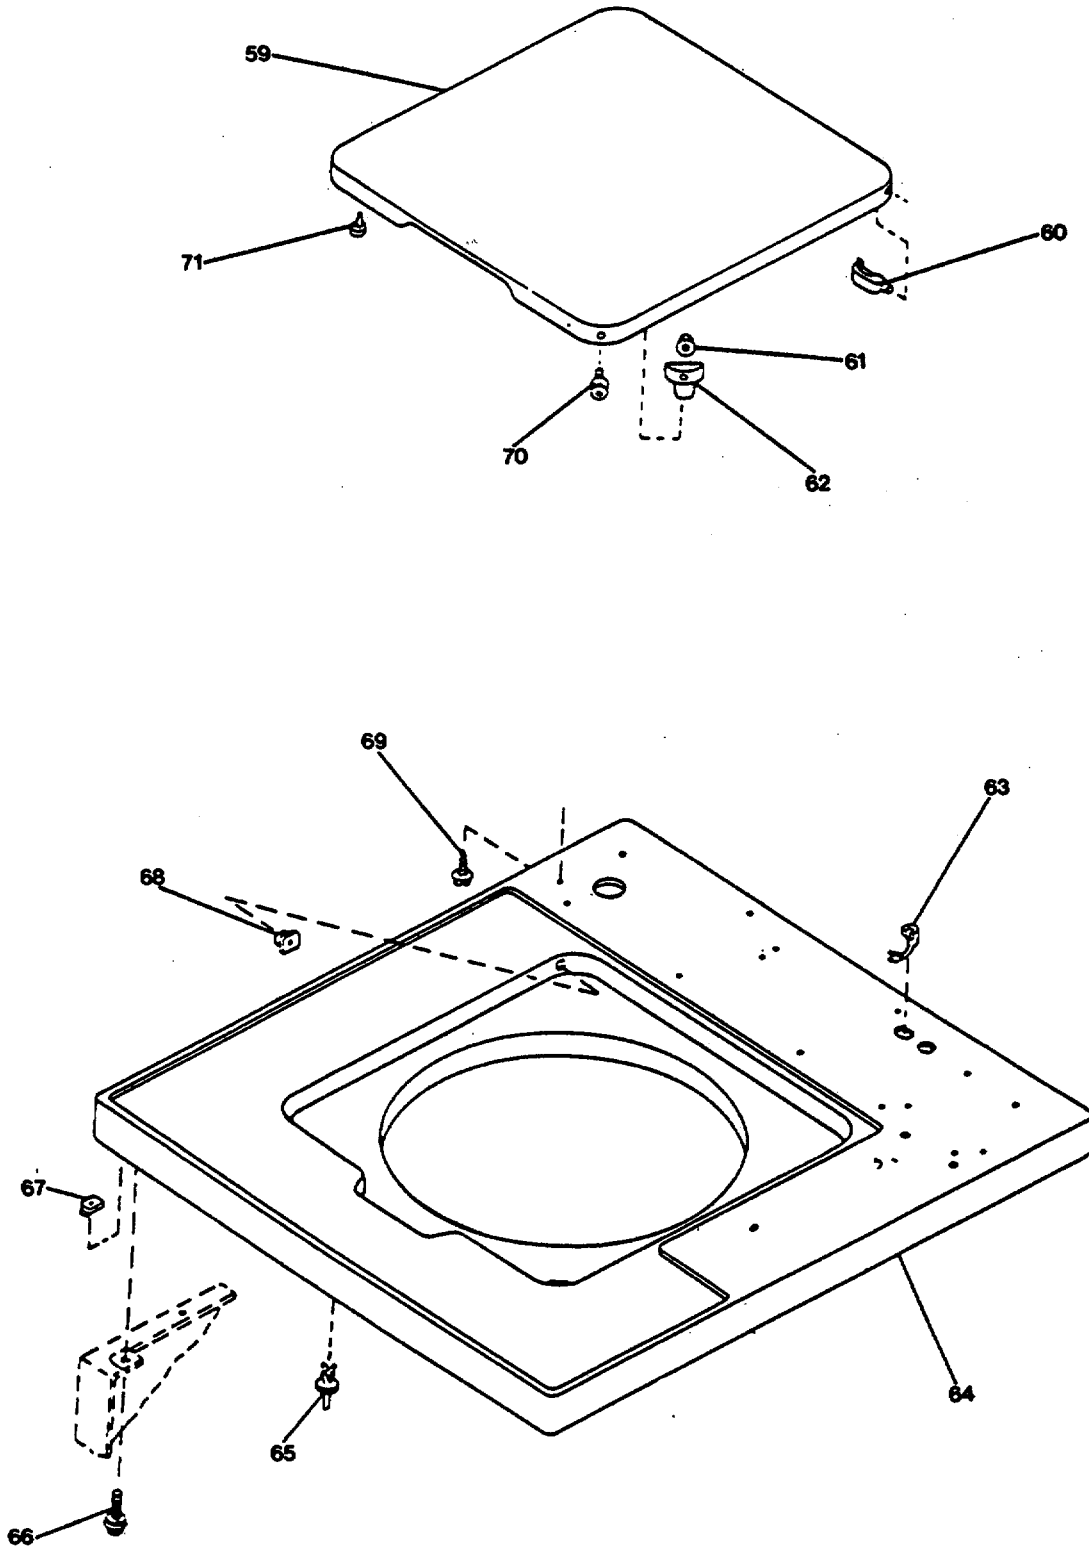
Washer Machine (Sheet 3 of 5).
